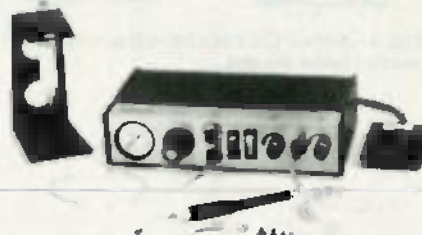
A COMBINED CREAM DISPENSER and vacuum-operated component-holding device simplifies the positioning and soldering of SMD and other micro-miniature components.
